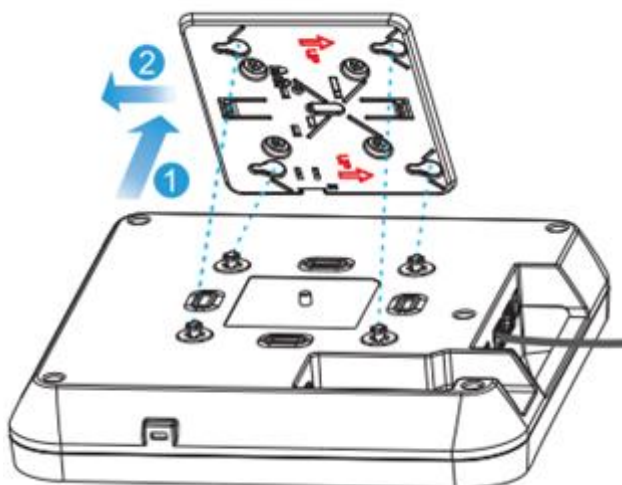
Aligning the Square Feet with the Mounting Holes
